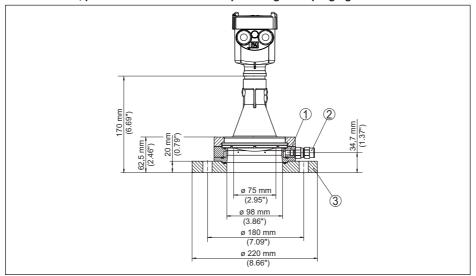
VEGAPULS 6X, adapter flange and purging air connection DN 100 PN 6
